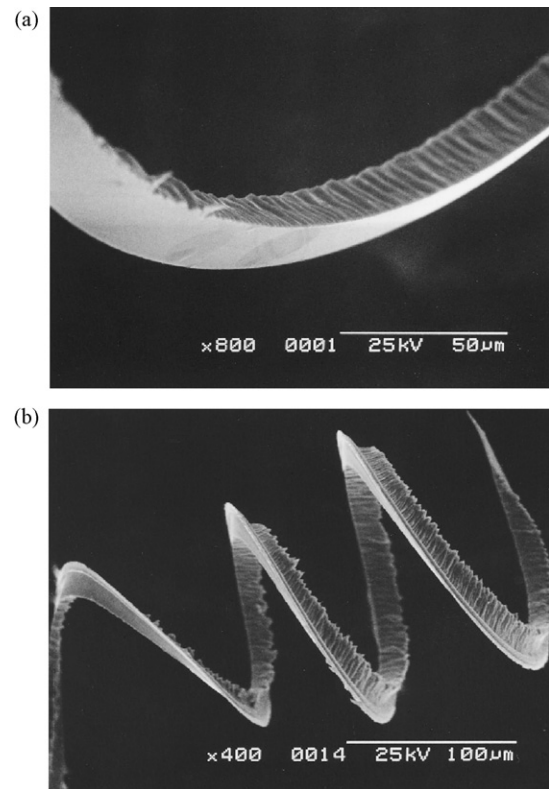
SEM photographs of cutting chips in: (a) the first cut and (b) the second cut.
